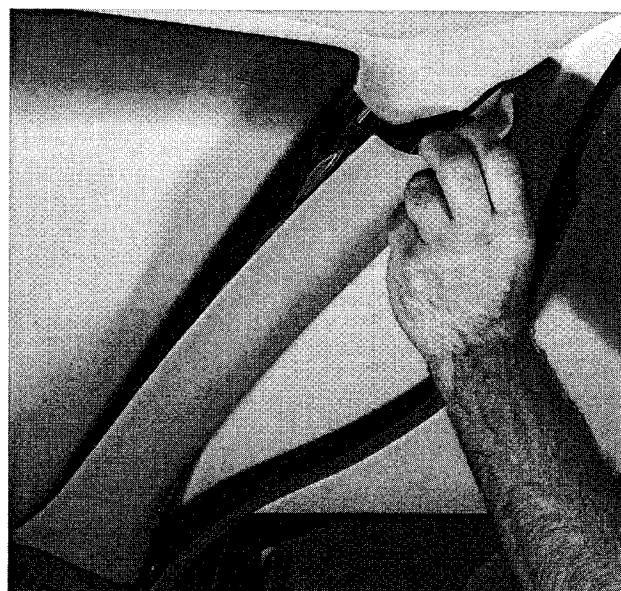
A-pillar (windshield pillar) trim removal. Right side shown, left is similar.
